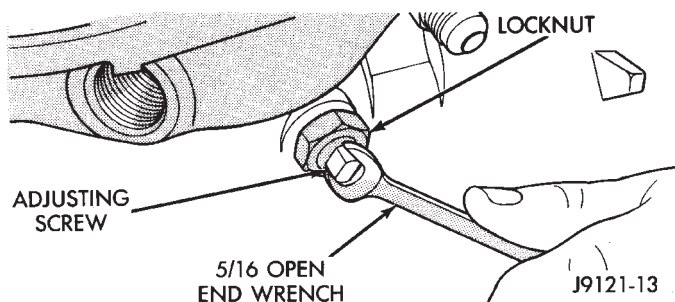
Tightening Front Band To Hold Front Clutch In Place
